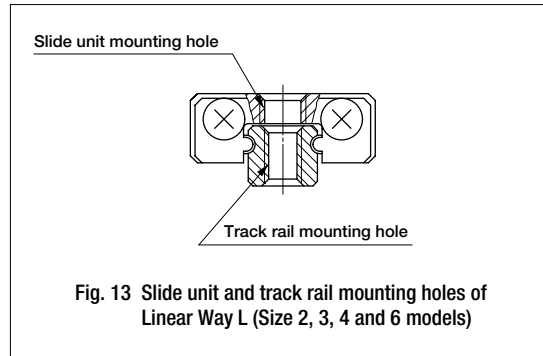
Slide unit and track rail mounting holes of Linear Way L (Size 2, 3, 4 and 6 models)
